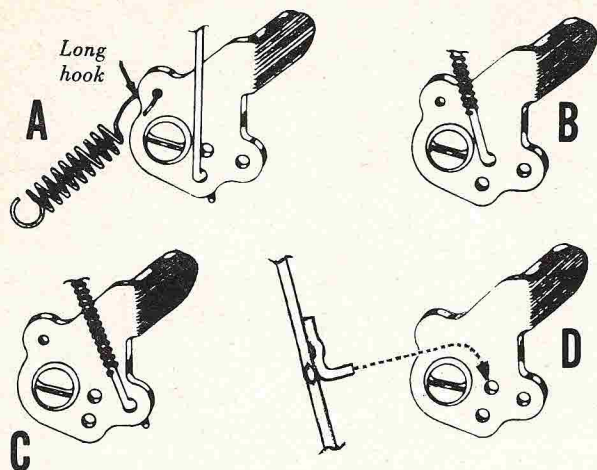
Views showing how governor rod and spring are connected to carburetor throttle shaft on different models. Hook governor rod as in view "A" on all direct drive models. View "B" refers to all 2-gear transmission models except 17, 5-20, Super Wiz 66 and Super 77. View "C" shows hook-up for models 17 and 5-20 and view "D" shows governor rod installation for models Super Wiz 66 and Super 77.
